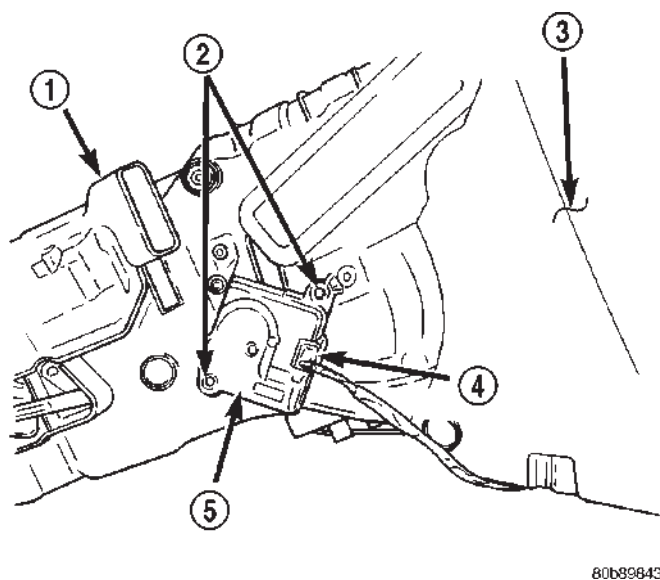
BLEND DOOR ACTUATOR REMOVE/INSTALL
